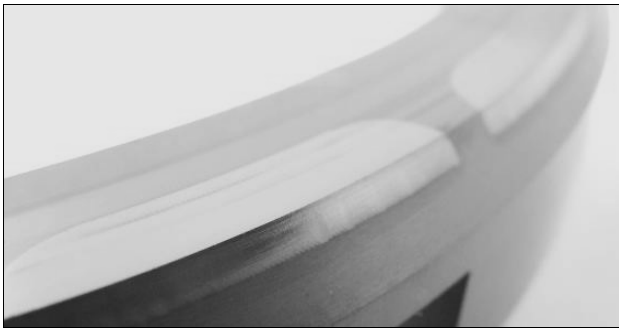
Rotating SiC seal face after a 168 hour test at 15.8 m/s circumferential speed
